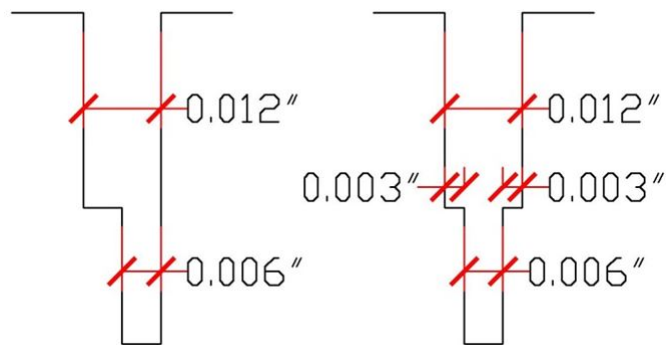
Flaw dimensions (height), undesired (left), desired (right)
